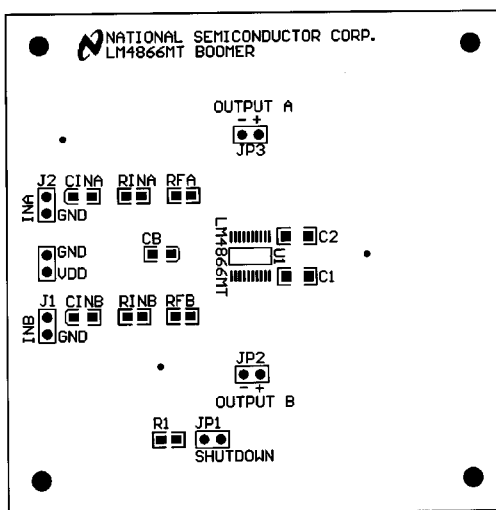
Recommended PW PC Board Layout: Component-Side Silkscreen
